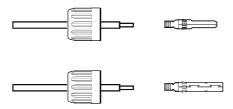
Insert the Wire into the Connector Cap nut and contact pin
